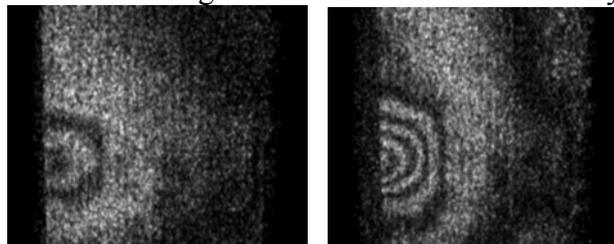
De-lamination on a helicopter rotor blade revealed using Shearography
